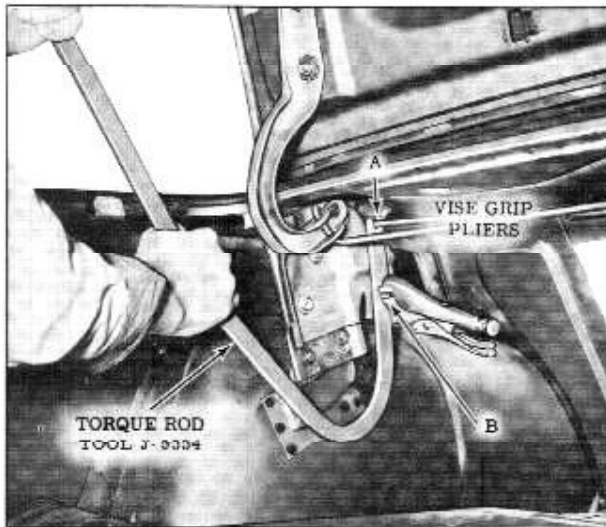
Rear Compartment Lid Torque Rod Adjustment
